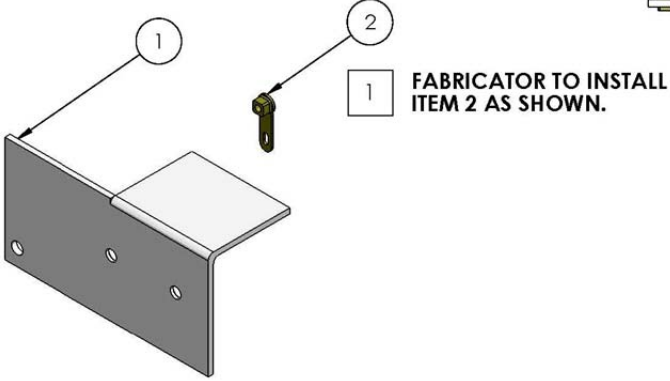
Secondary Heat Sink Sheet Metal Drawing.
